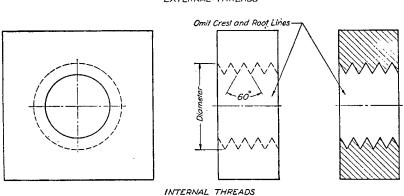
Thread representation. (Suggested for threads drawn 1" or over on both assembly and detail drawings.)
